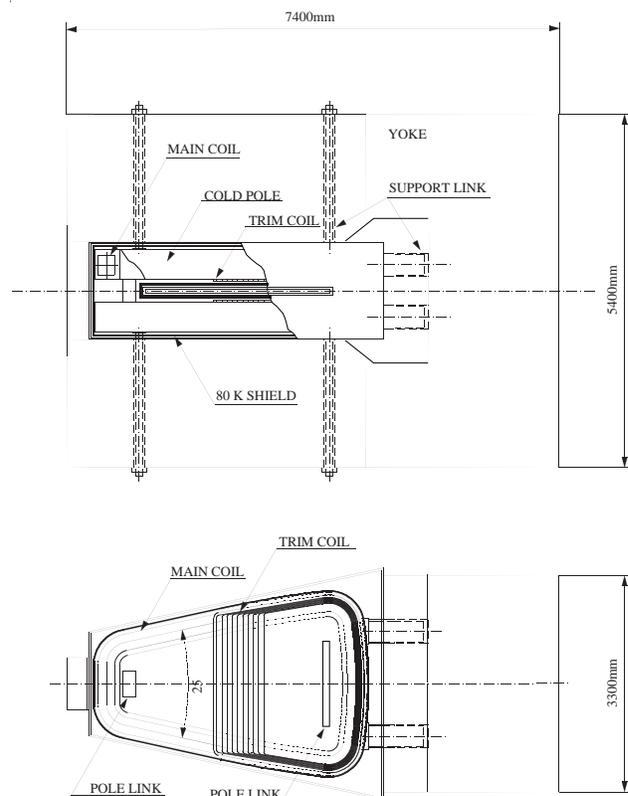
Schematic drawing of the model sector magnet: a side view (upper figure); a top view (lower figure).
